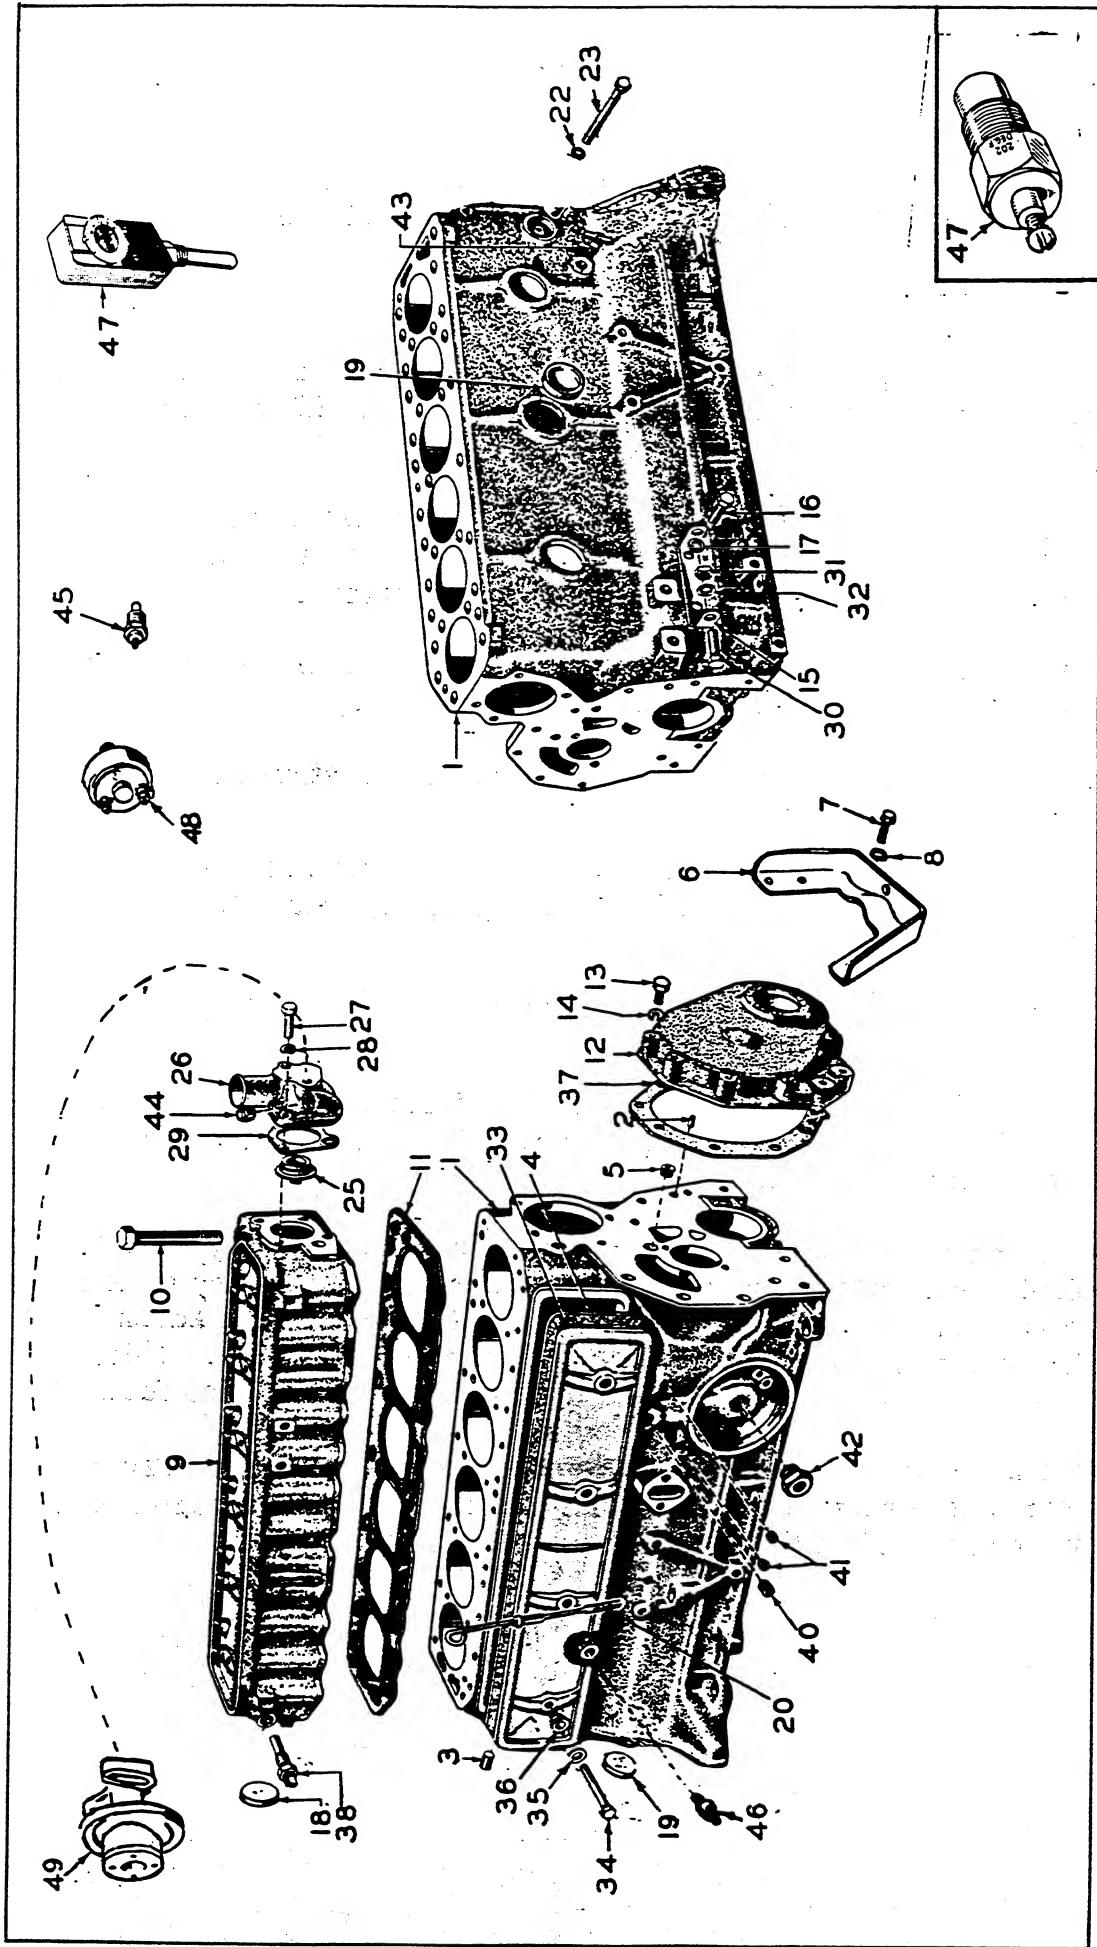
EXTERNAL VIEW, ENGINE PARTS GROUP
